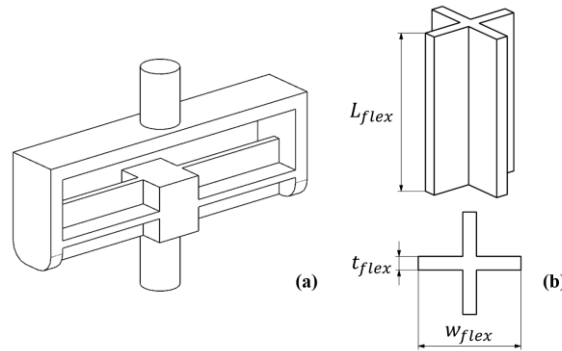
Cruciform Flexure Joint. Layout (a) and dimensional properties (b).
